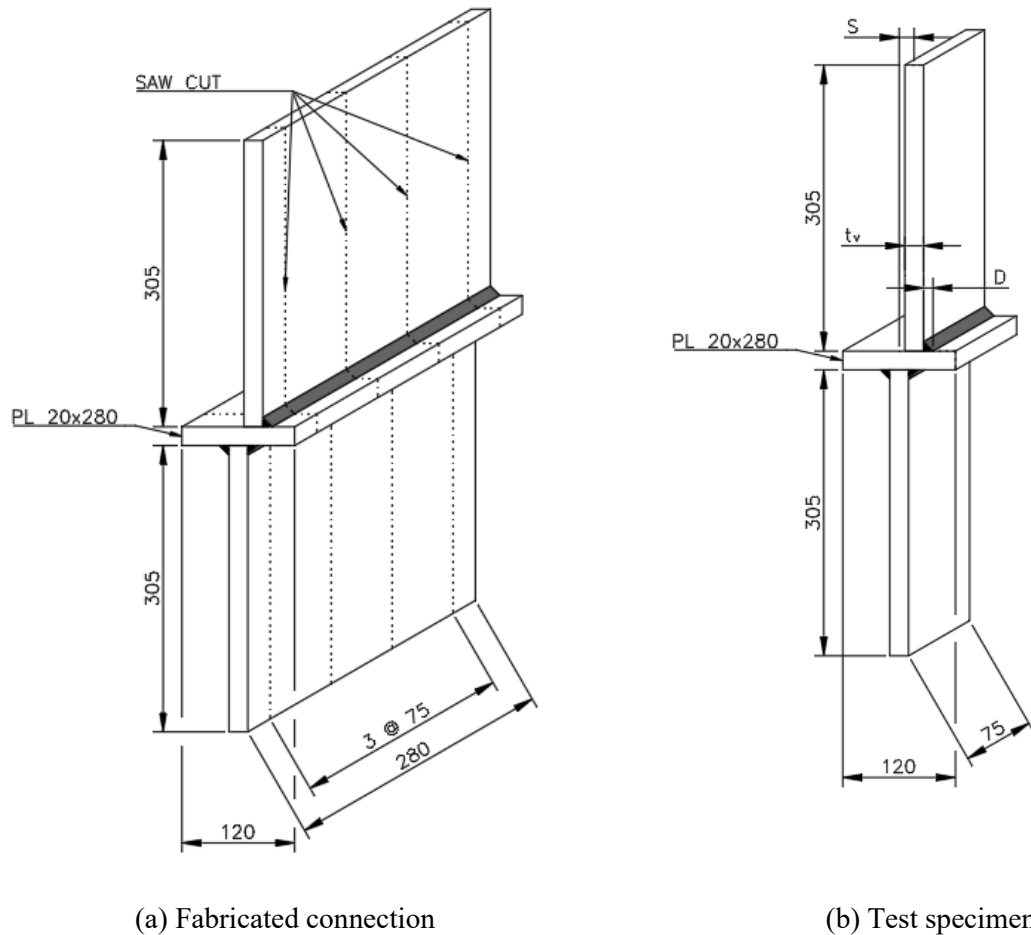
Welded ETLCC connections and test specimens
